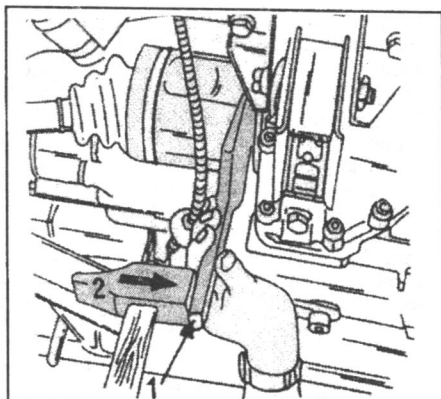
Removal of the L.H. drive shaft. Insert the chisel in the direction of the arrow (1) and then hit it with a hammer in direction (2). The shaft will come out of the gearbox connection.
